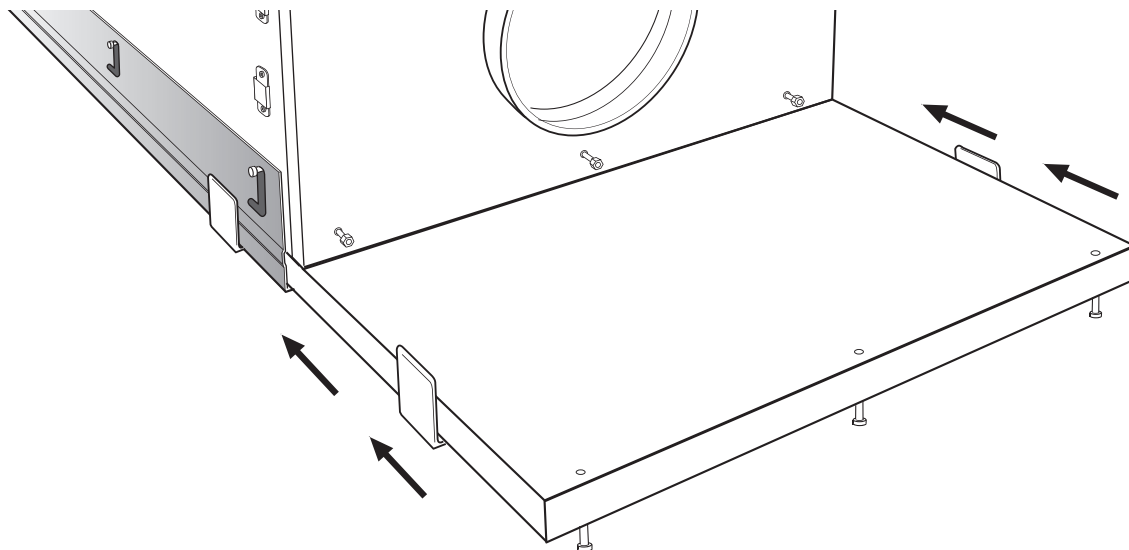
Step 6: Lift the extrusion (on each side of the unit) containing the access panel to its original position so that the 3 extrusion fixings move back to the bottom of the "L" cut-out shapes as shown in (A) Fig 15d and lock.
